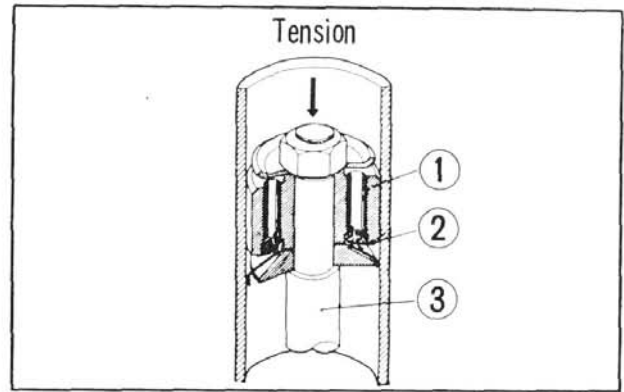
① Piston ② Valve ③ Rod
